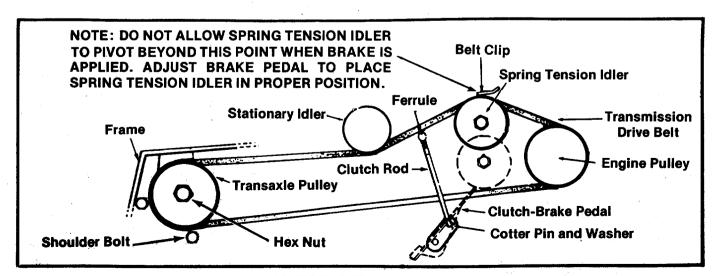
CLUTCH BRAKE PEDAL ADJUSTMENT
